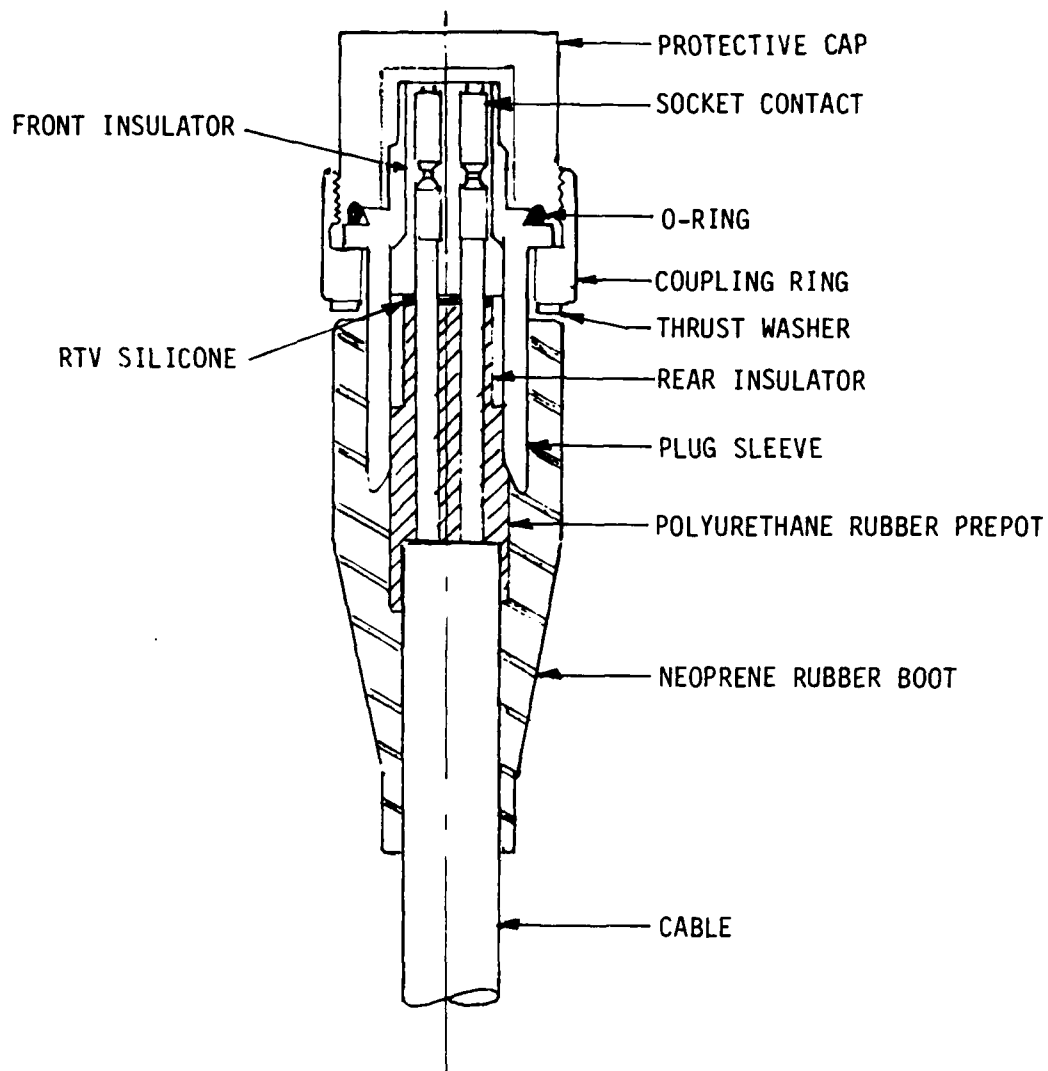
NEOPRENE MOLDED MIL-C-24217 PLUG ASSEMBLY
